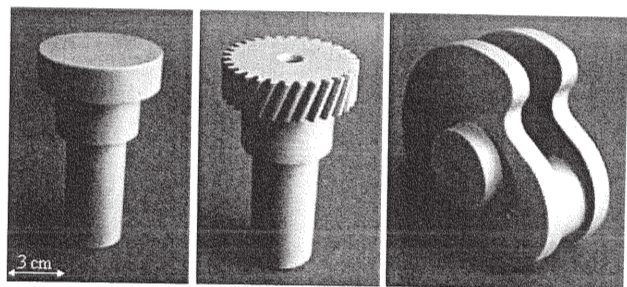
Splined shaft model geometry (left), single-cylinder crankshaft (right) and precision forged splined shaft (centre).
